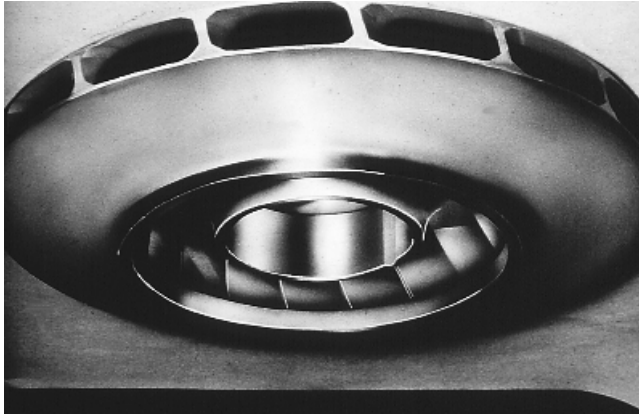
Three-piece impeller design. (*Dresser-Rand Company, Olean, N.Y.*)
